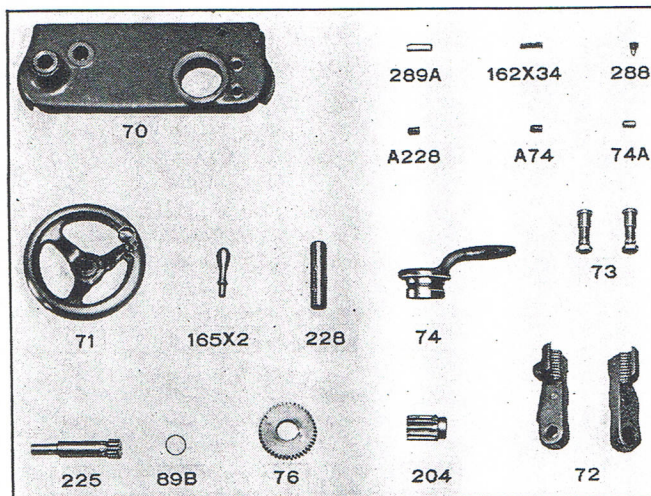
Apron Parts for Model C 9-inch "Workshop" Lathes.
